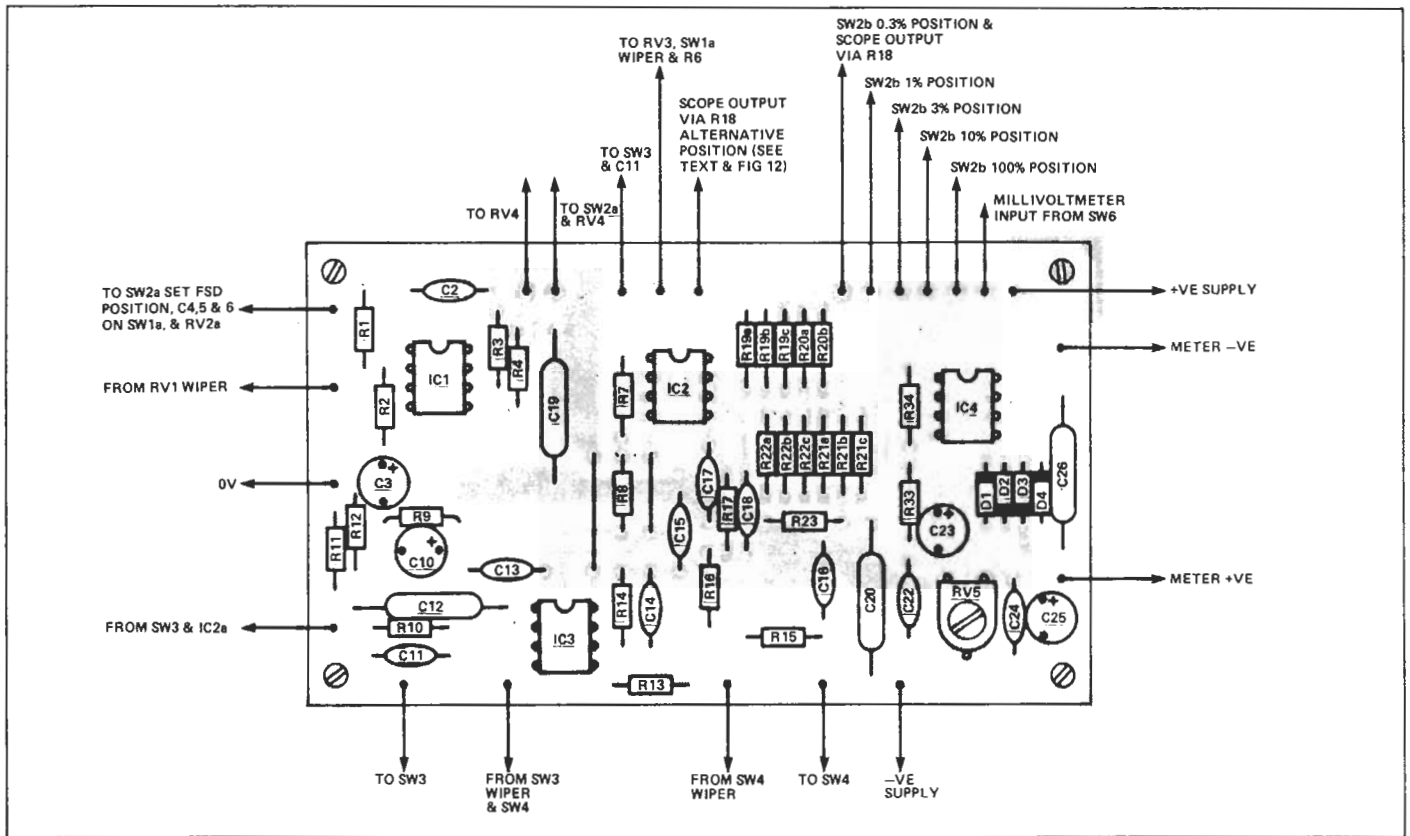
Component overlay of the THD and millivoltmeter PCB.
